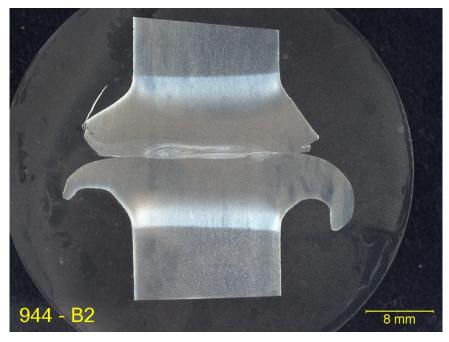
Macro View of Weld 944 Taken from Base of Rail
